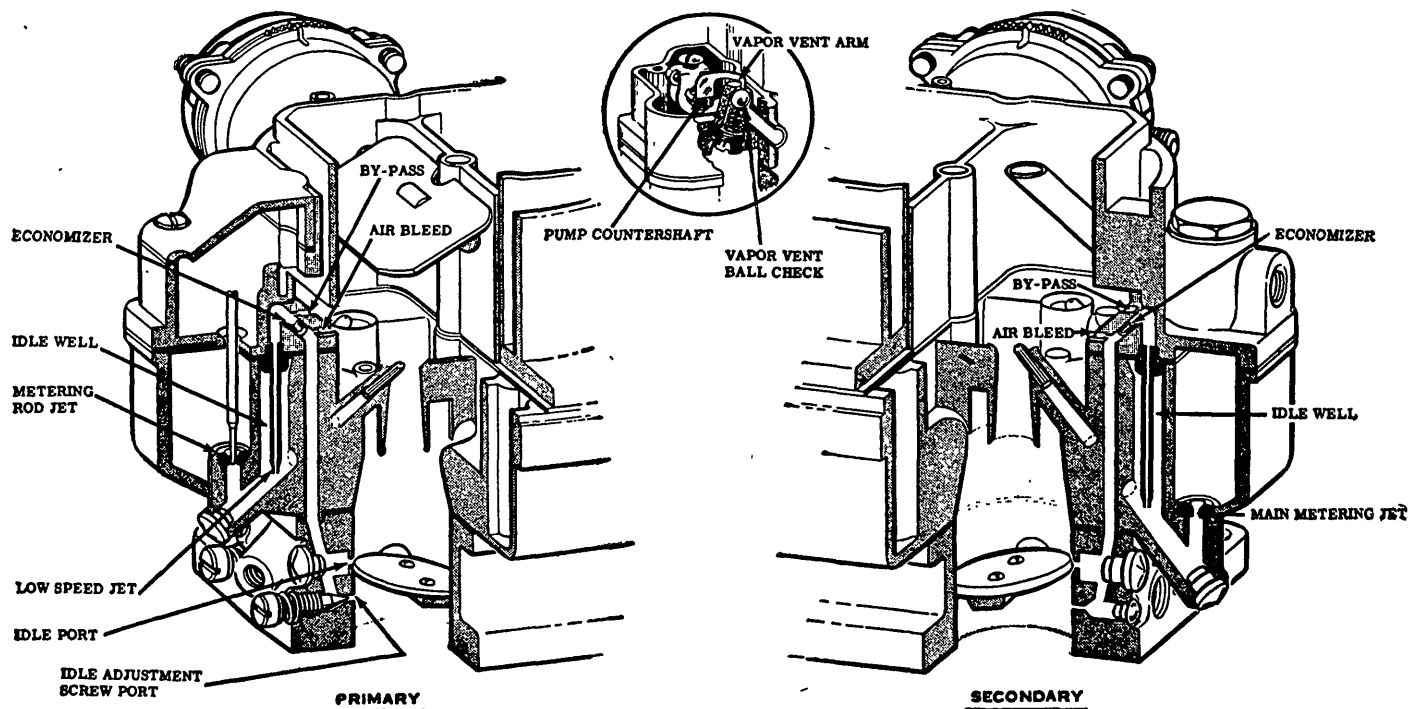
Carter WCFB low speed circuit on Oldsmobile. Buick units employ auxiliary throttle valves above secondary throttle valves
